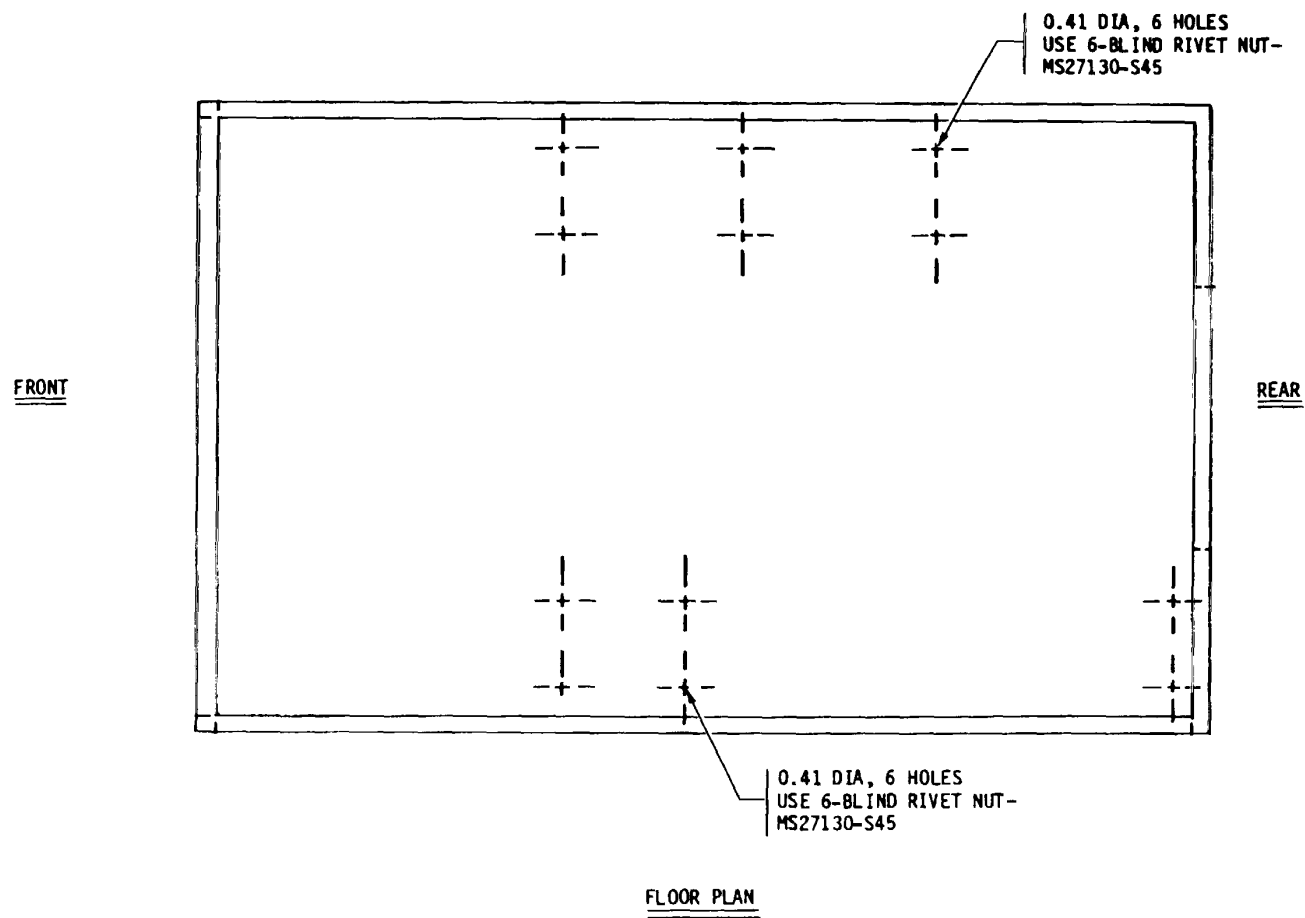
Dimensions for Installation of Blind Rivet Nuts, Unit 1, 280, Floor.
